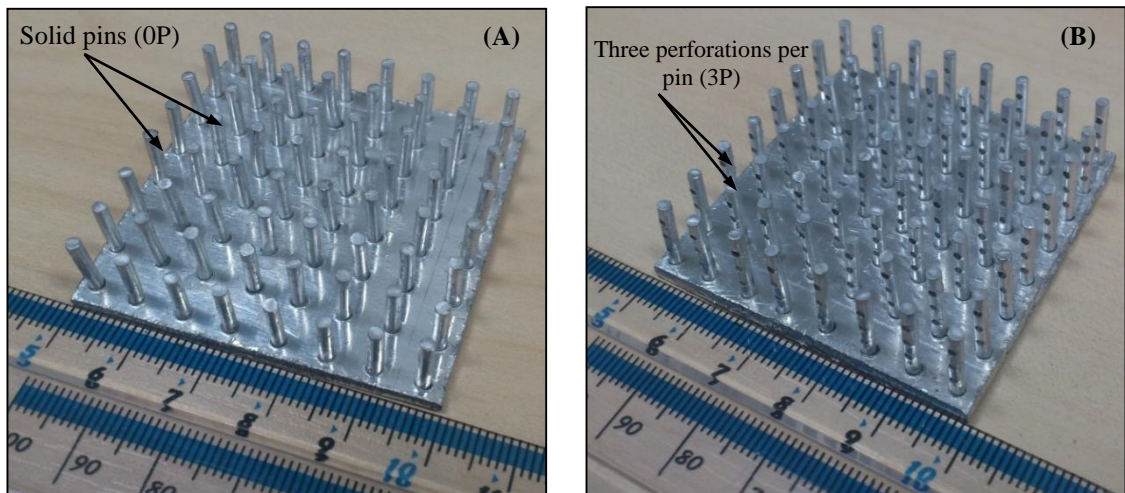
Final design of (A) solid pin fins and (B) perforated pin fins heat sinks
